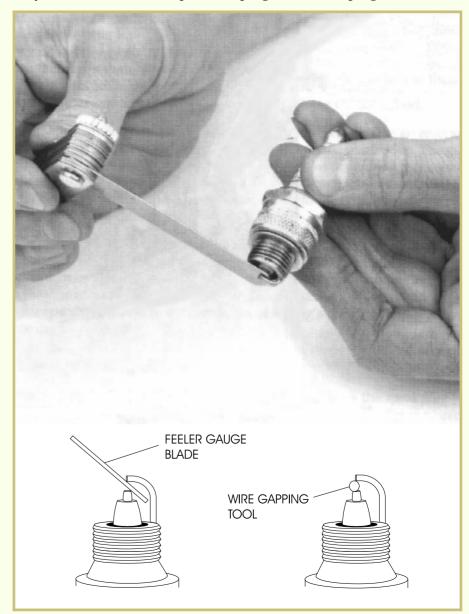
A feeler gauge can be used to measure the spark plug gap, but it may not be as accurate as the wire gapping tool.
